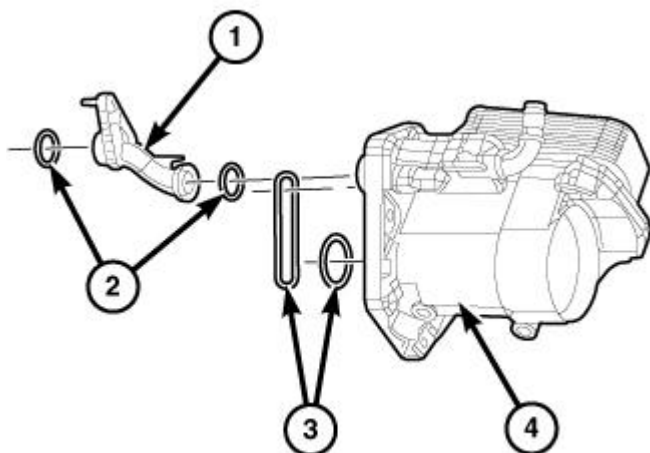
Oil Filter Tube & Housing With O-Ring Gaskets
